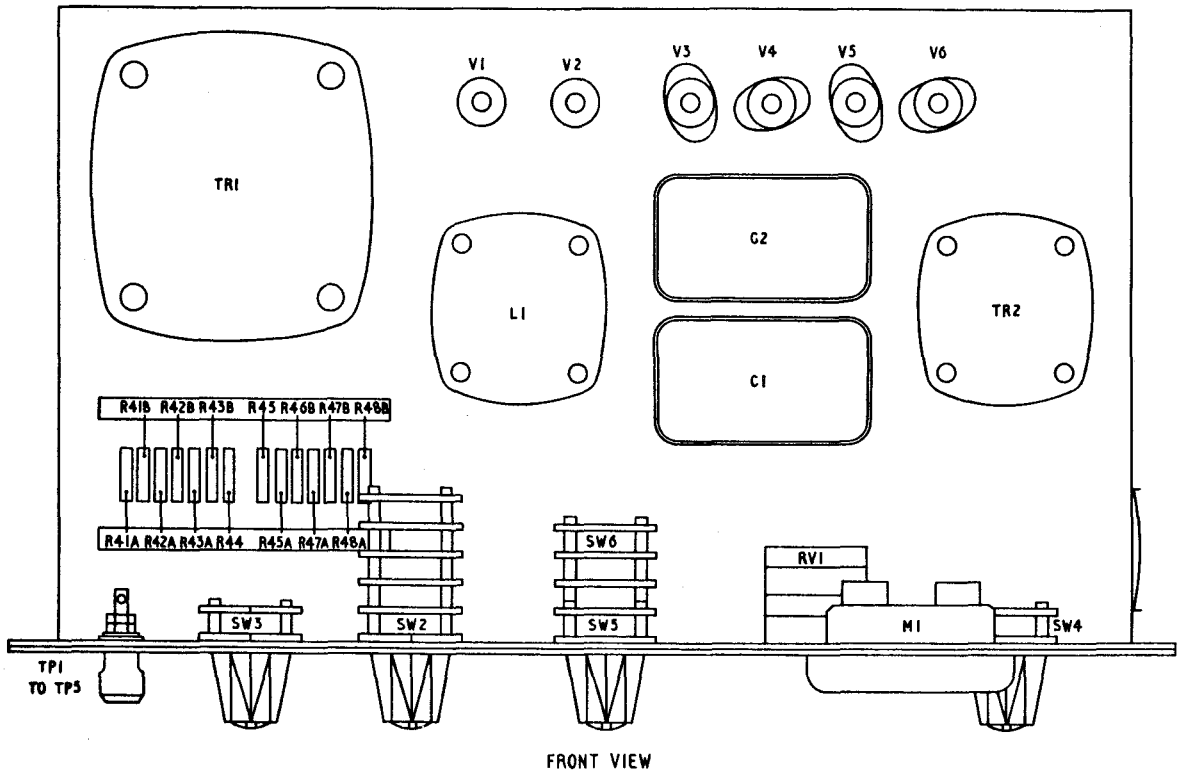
◀ Calibrator, d.c. 6625-99-933-2618: ▶ component layout
